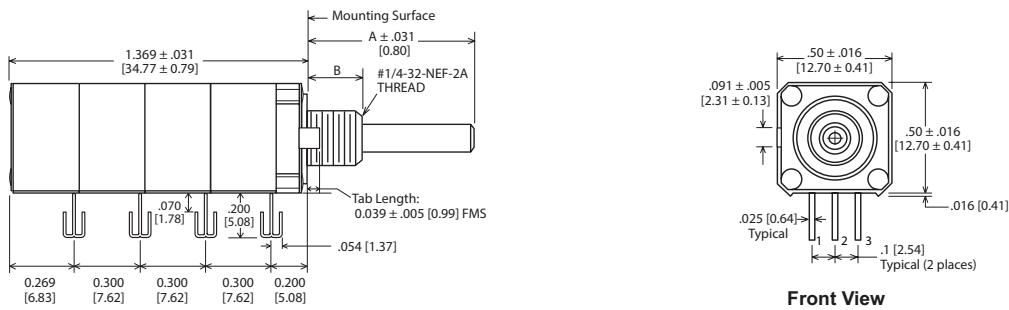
SHA: Dual Potentiometer or RS, Solder Hooks, 1/4" Dia. Bushing
